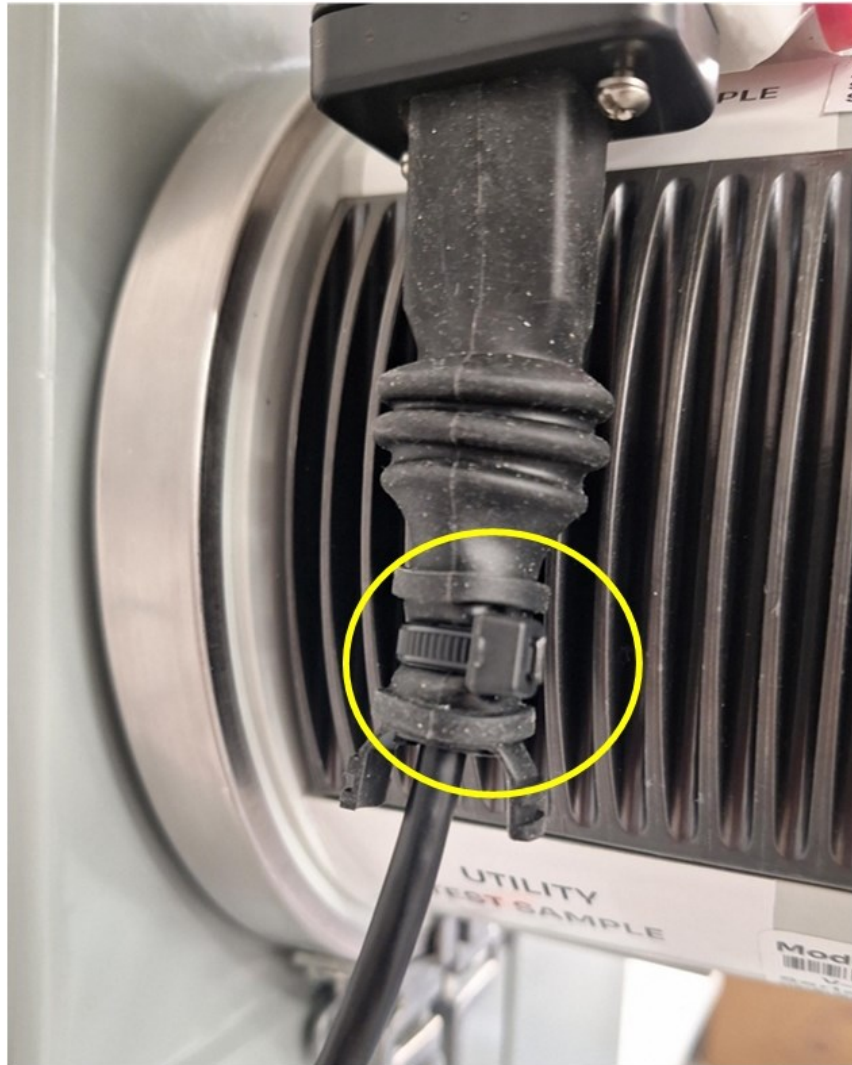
Torque Boot Assembly Screws to 2 in. lbs.
